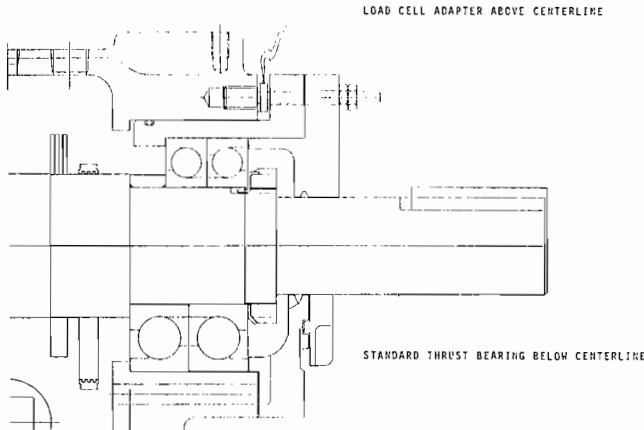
Detail of Axial Thrust Load Cell Installation in Test Pump.
